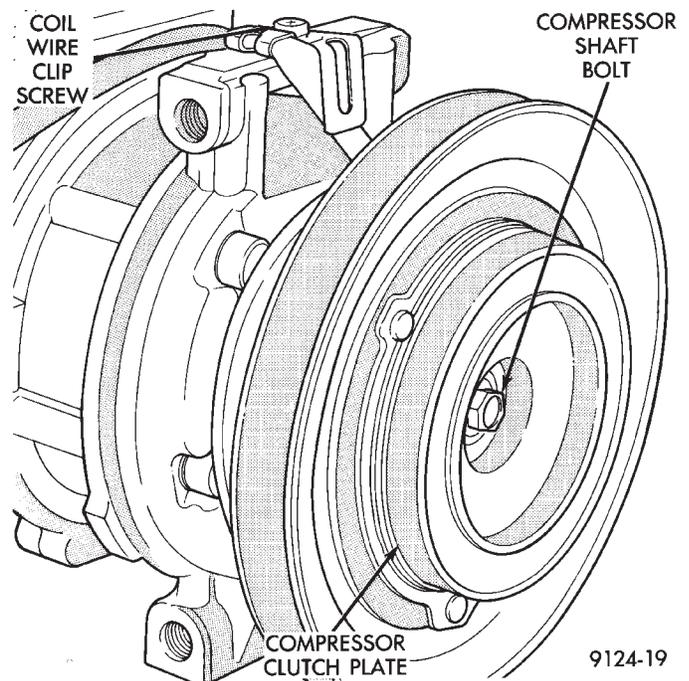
Compressor Shaft Bolt and Clutch Plate
